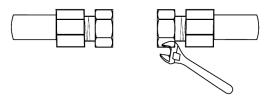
Installation diagram 4 Align the meter with the connecting accessories and install it:
